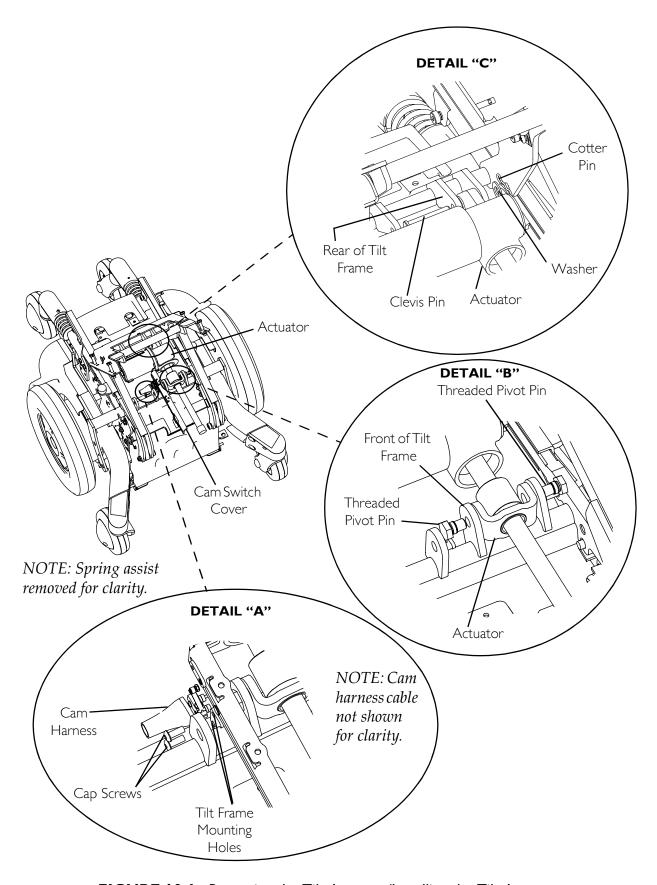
Removing the Tilt Actuator/Installing the Tilt Actuator
